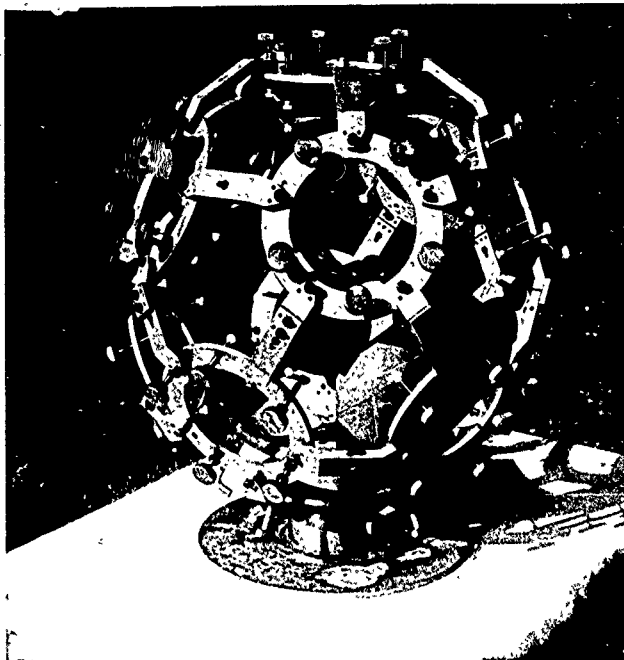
Jig for assembly of individual spherical pentagons into a 15-inch-diameter capsule.
